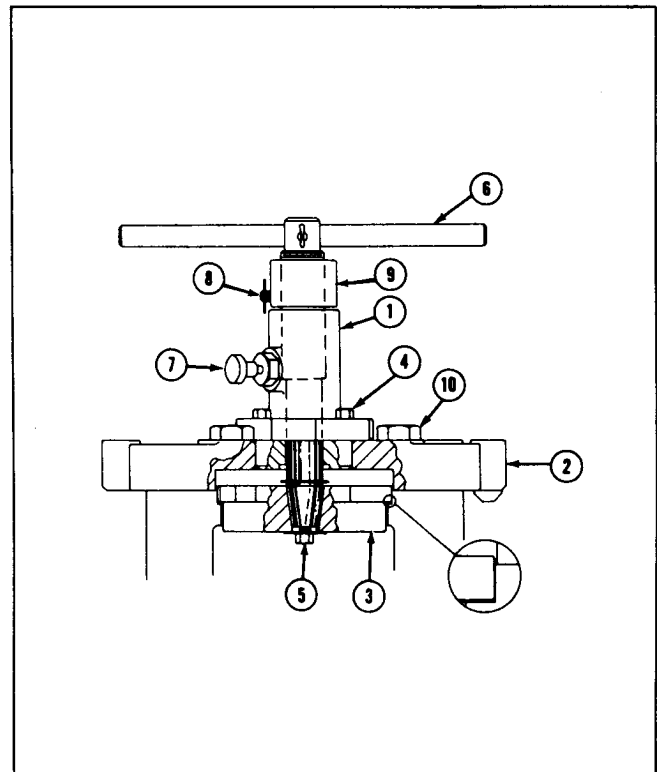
, (V40156). ST-1295 Counterbore Tool
